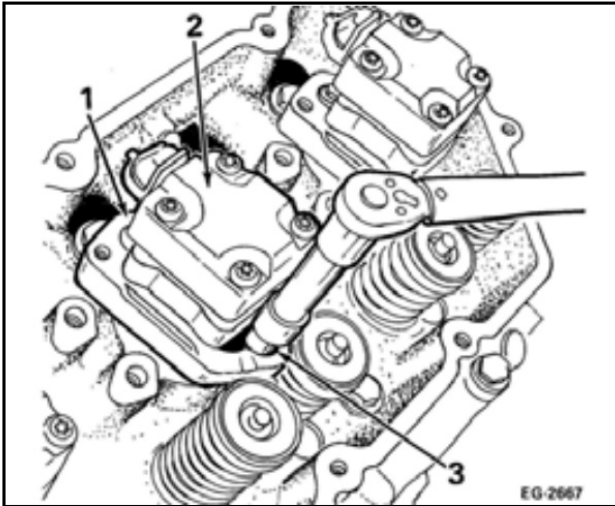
Installing the Fuel Injector Hold Down Clamp Mounting Bolt
